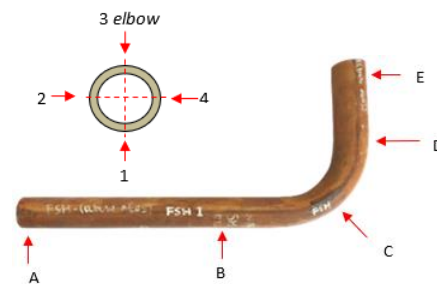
Thickness measurement of the boiler tube (left), and the location of measurement (right)
